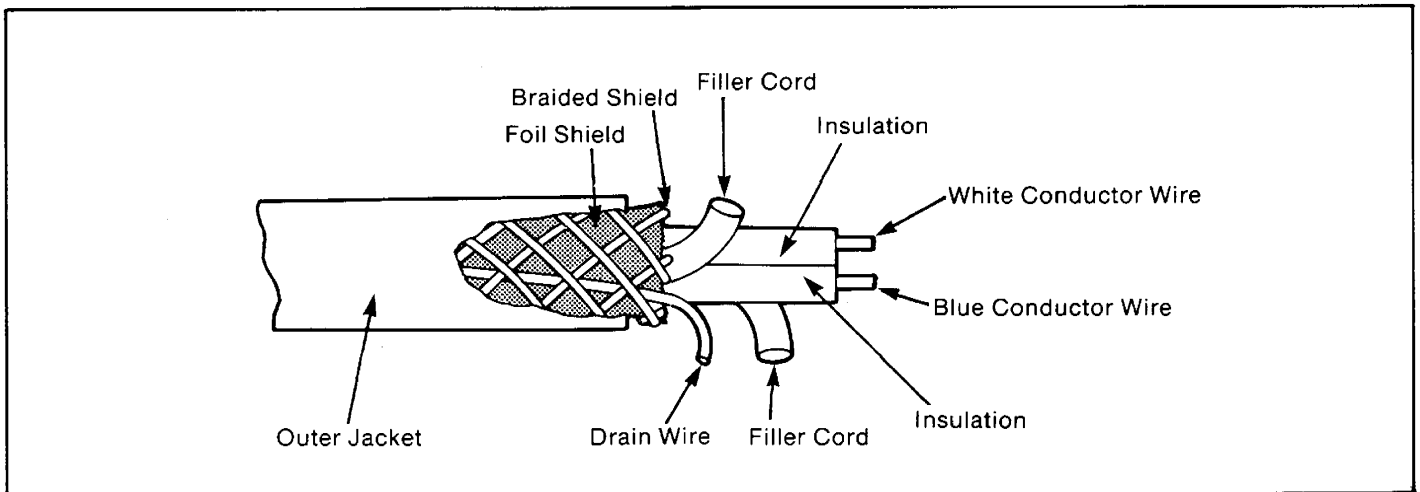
Components Making up a Multi-Conductor Shielded Cable
